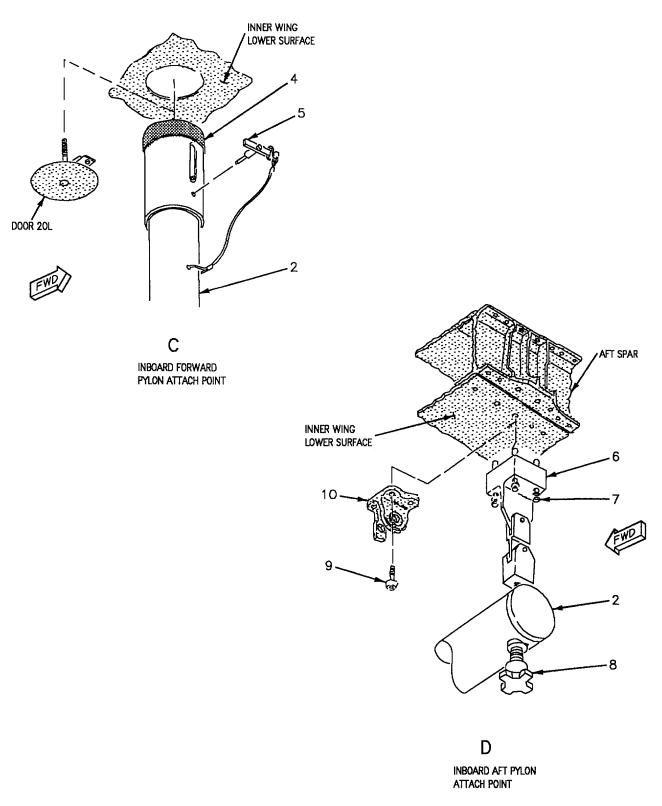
Inner Wing Removal and Installation Adapter (Sheet 3)
